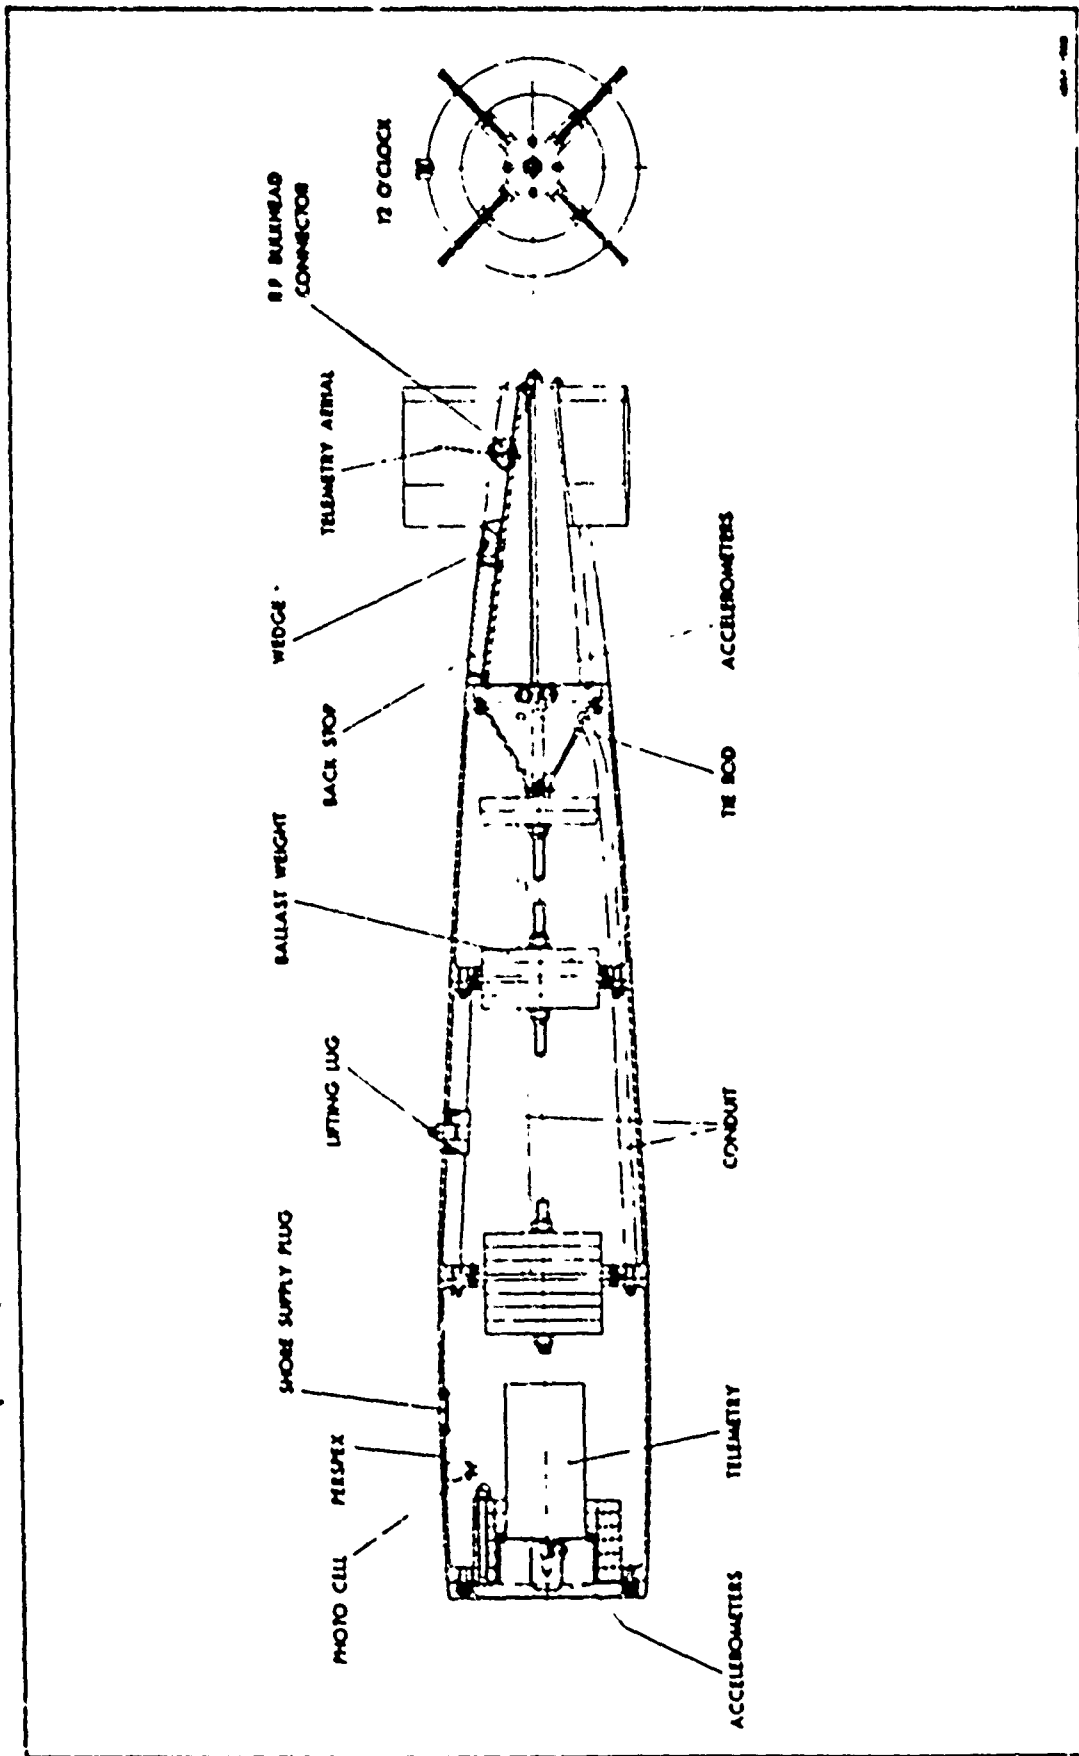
GENERAL ASSEMBLY OF THE M557B TEST VEHICLE
